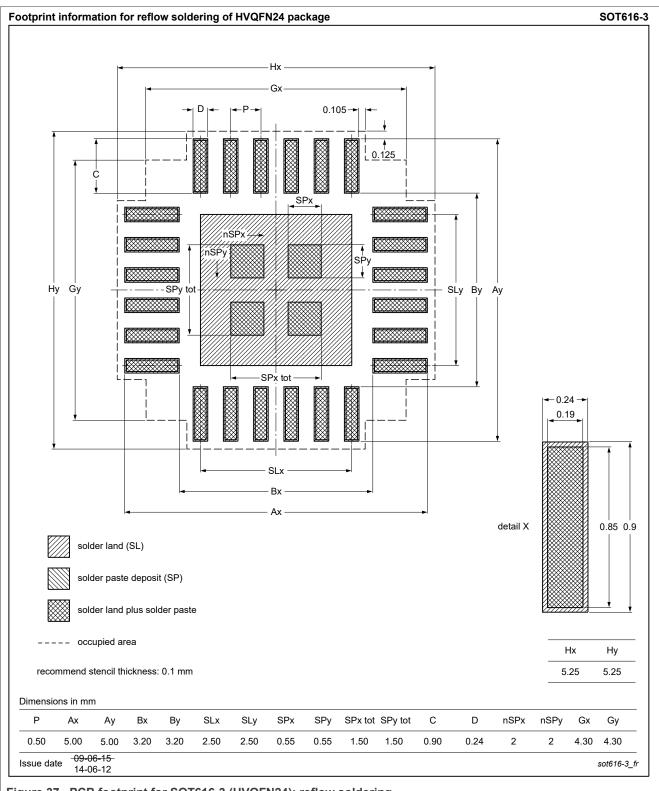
PCB footprint for SOT616-3 (HVQFN24); reflow soldering
